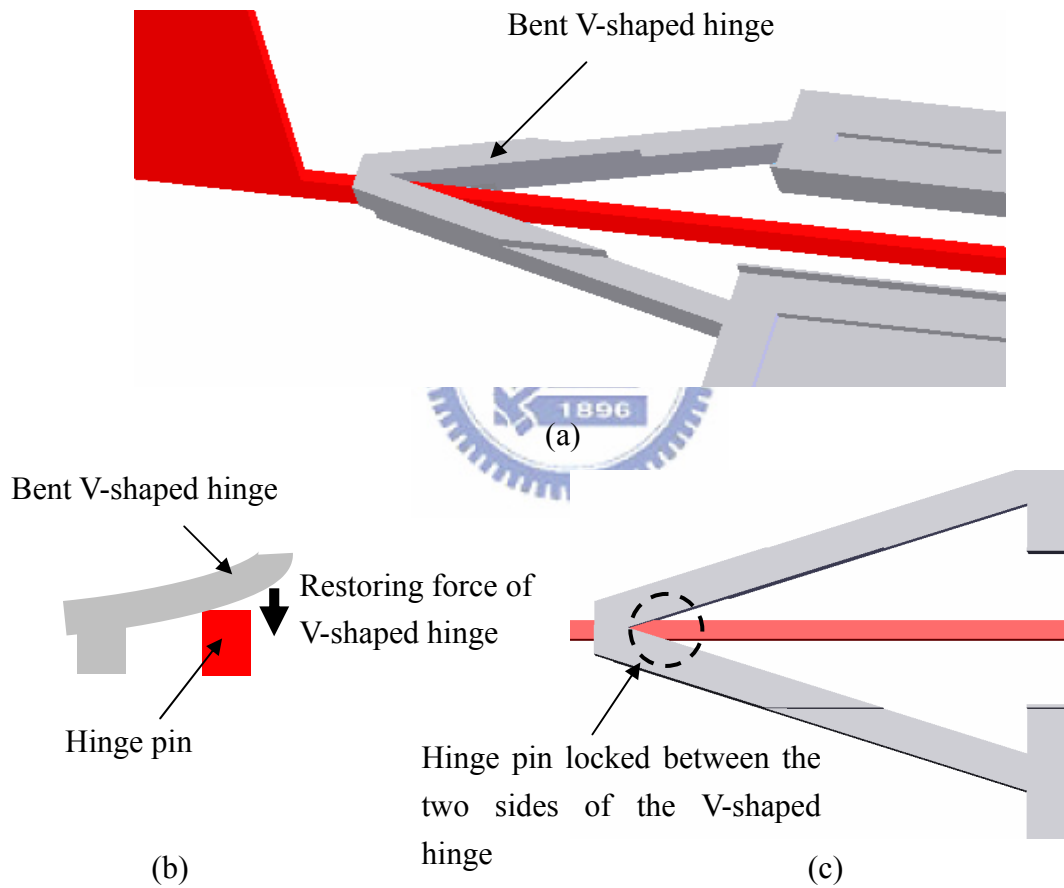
(a) 3-D solid model of the V-shaped hinge after assembly, (b) cross-section view of the restricted z-direction movement, (c) top view of the positioning mechanism.
